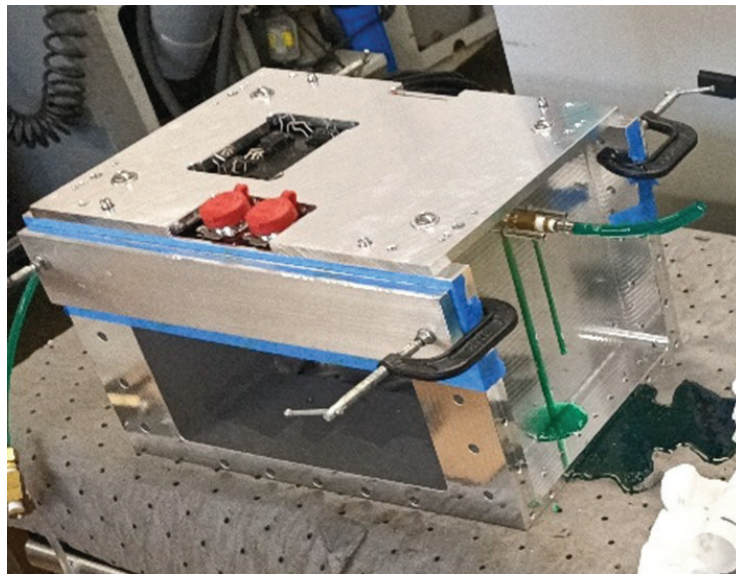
After the vacuum sealant injection is completed, the baseplate is added to complete the initial module assembly.
